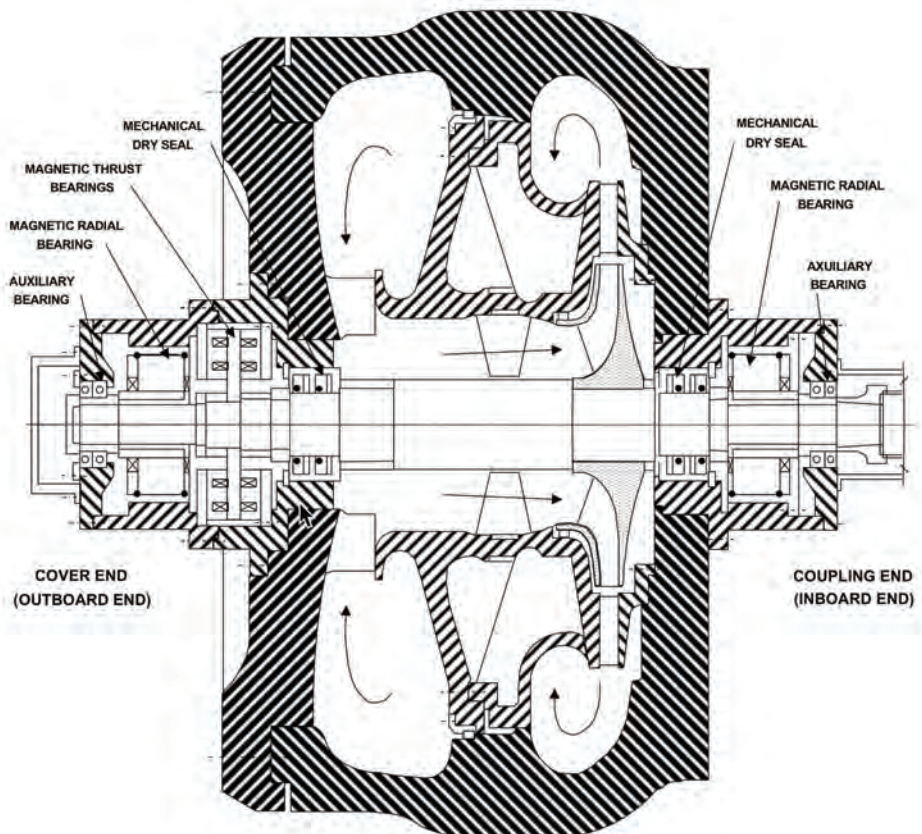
Internal design of a beam-type centrifugal compressor with magnetic bearings.
